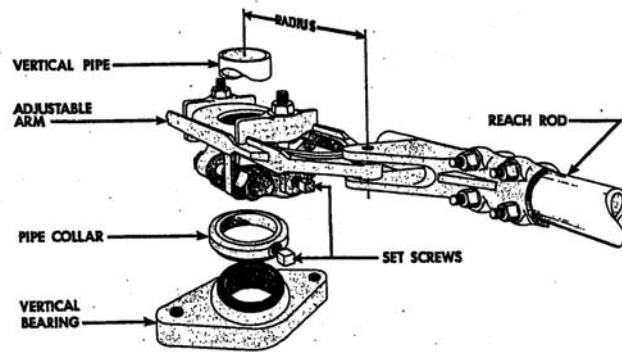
Adjustable arm assembly. CAUTION: Pipe collar must support full weight of pipe.
